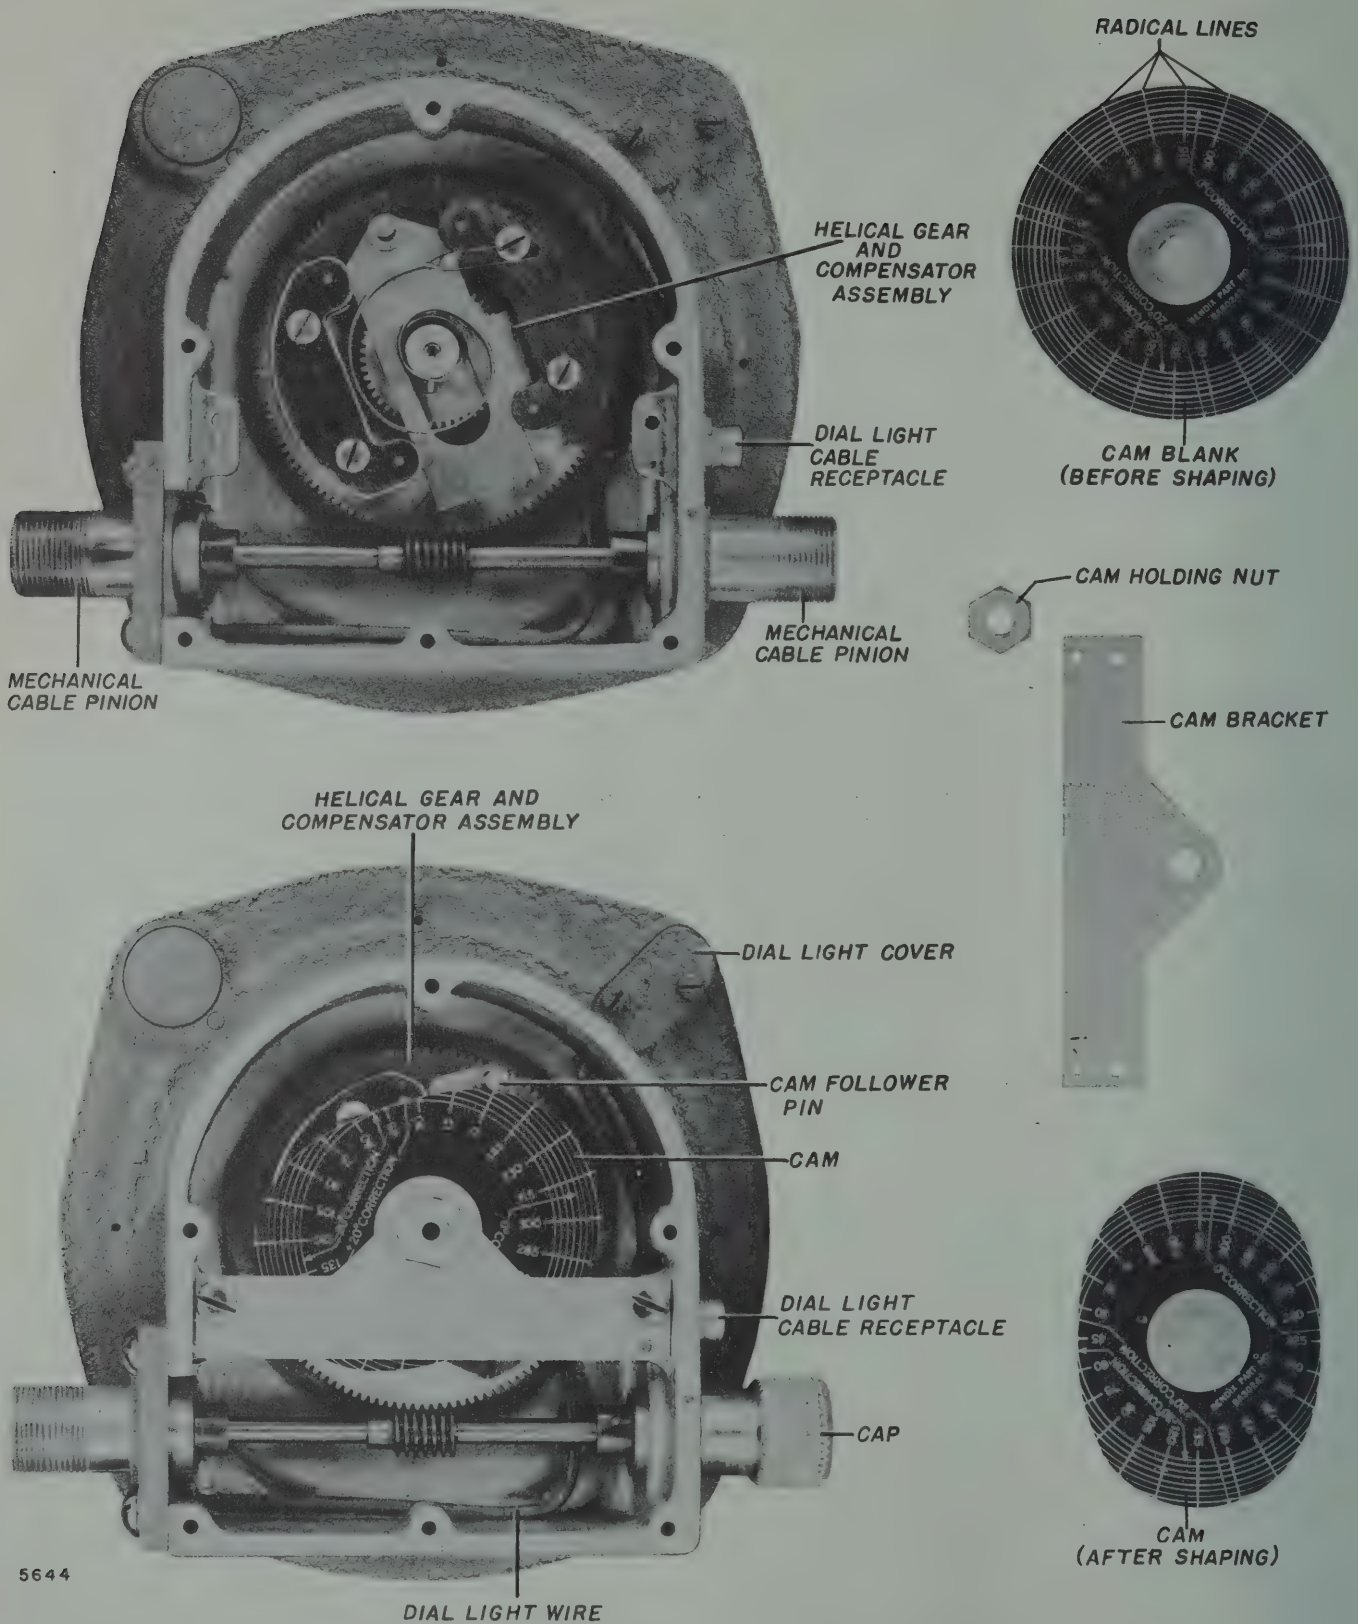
TYPE MN-22A AZIMUTH INDICATOR, DISASSEMBLY
